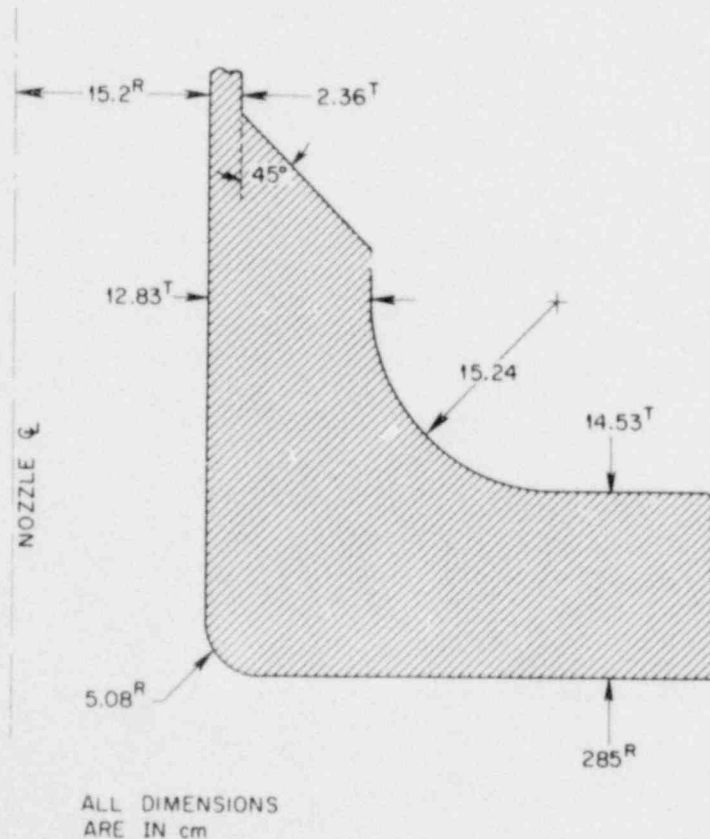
Geometry and dimensions of a BWR feedwater nozzle.
